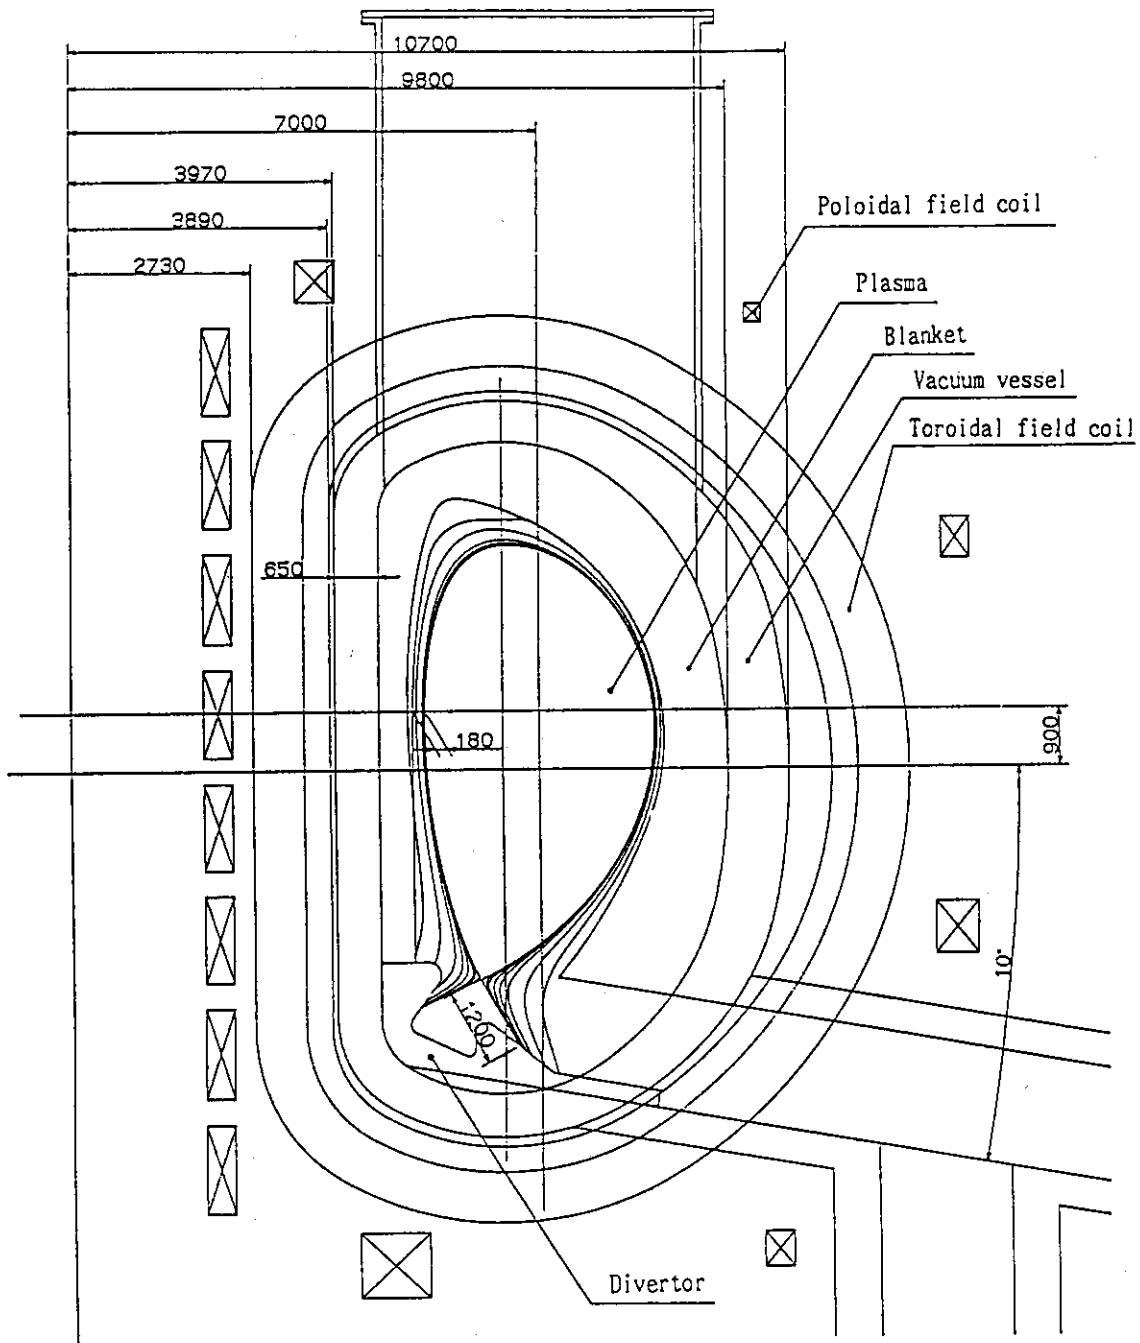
Elevation view of SSTR in-core structure layout.
